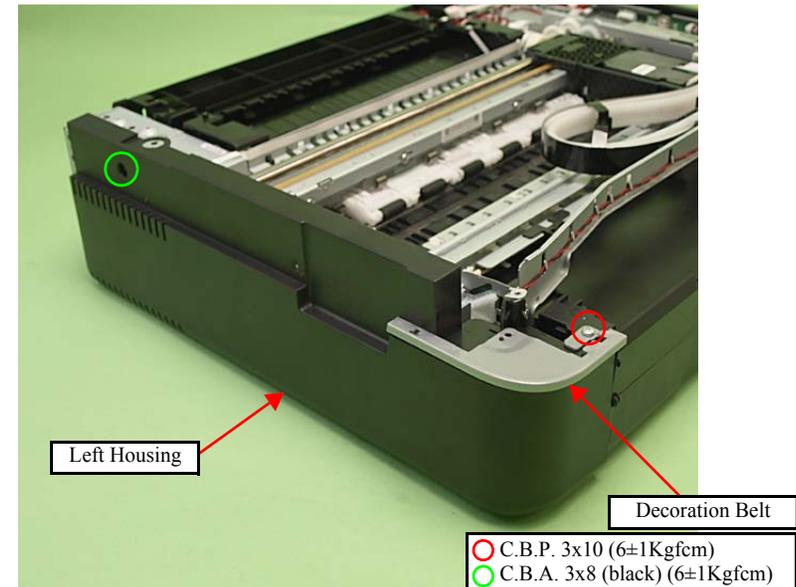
Removing the Left Housing / Decoration Belt L (1)
